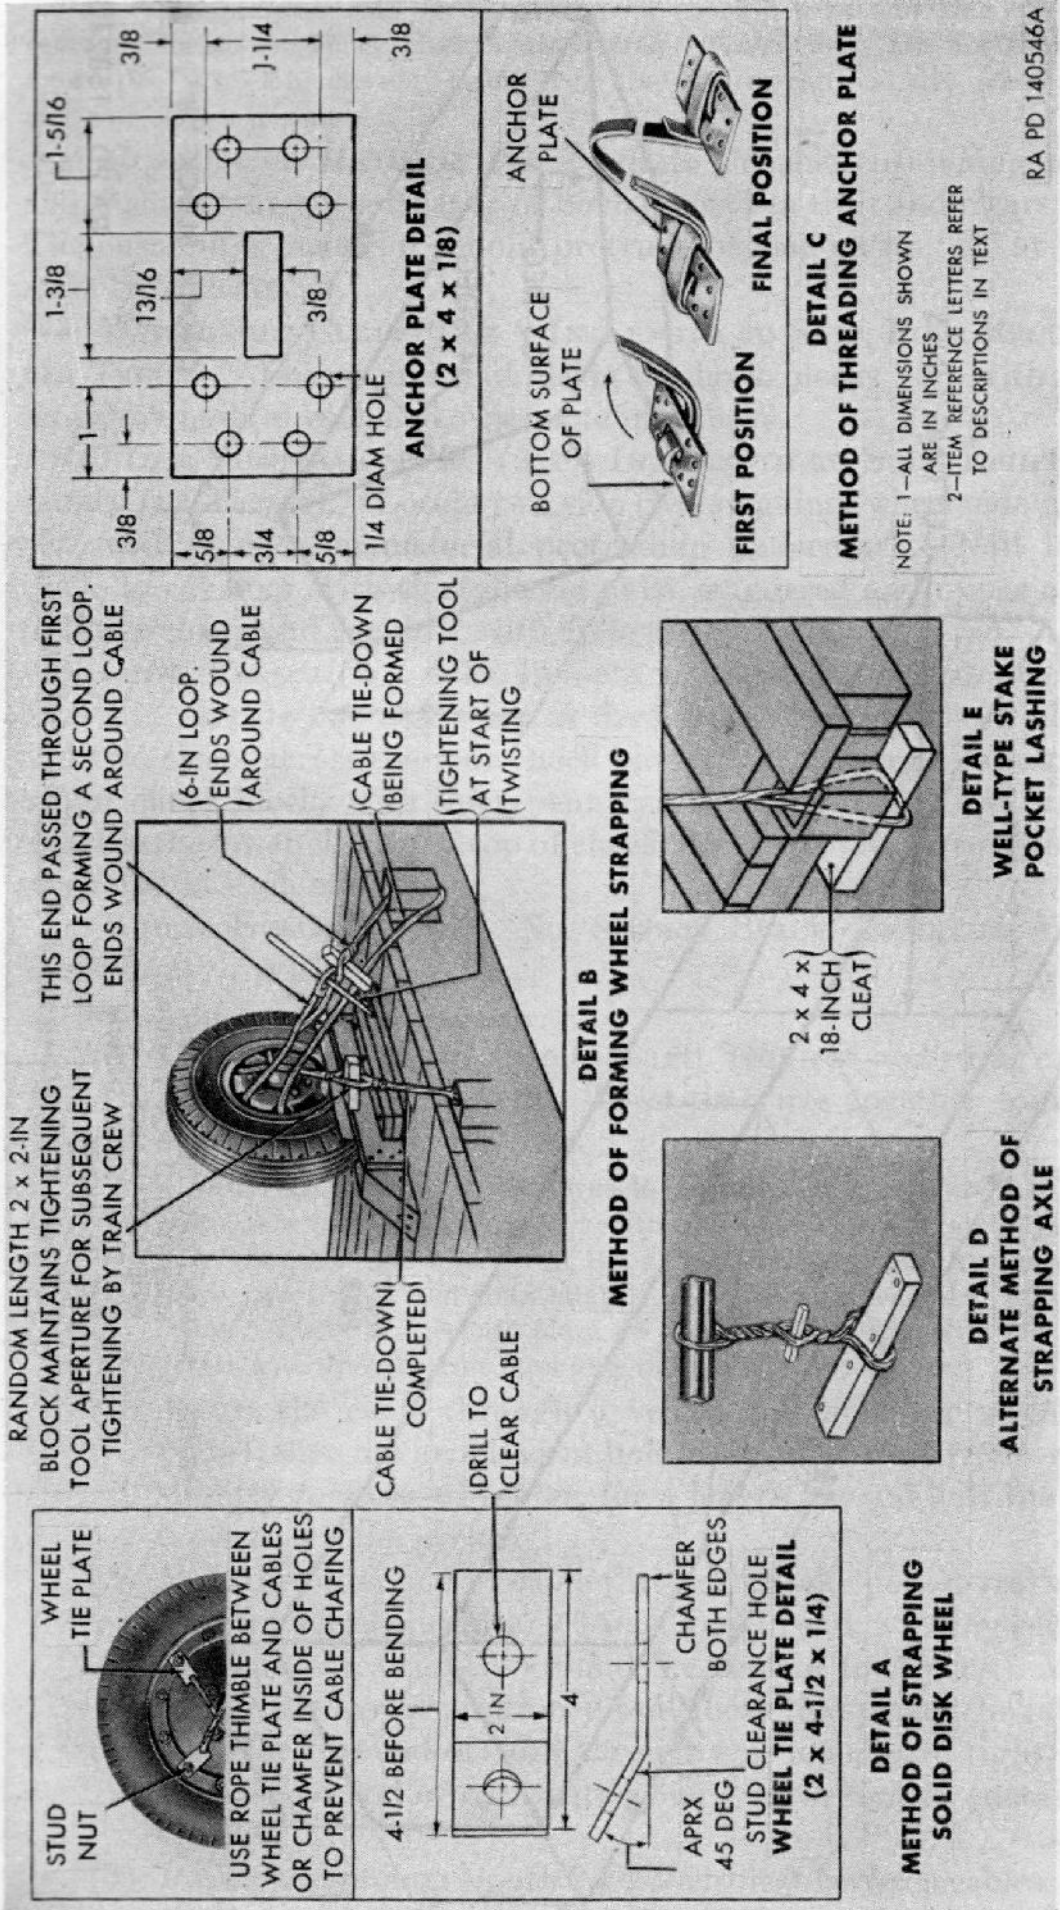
Method of blocking the 20 1/2-ton 6 x 6 cargo truck M135 (REO) for rail shipment—blocking details.
